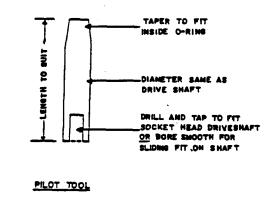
Pilot tool for insertion of socket head drive shaft
